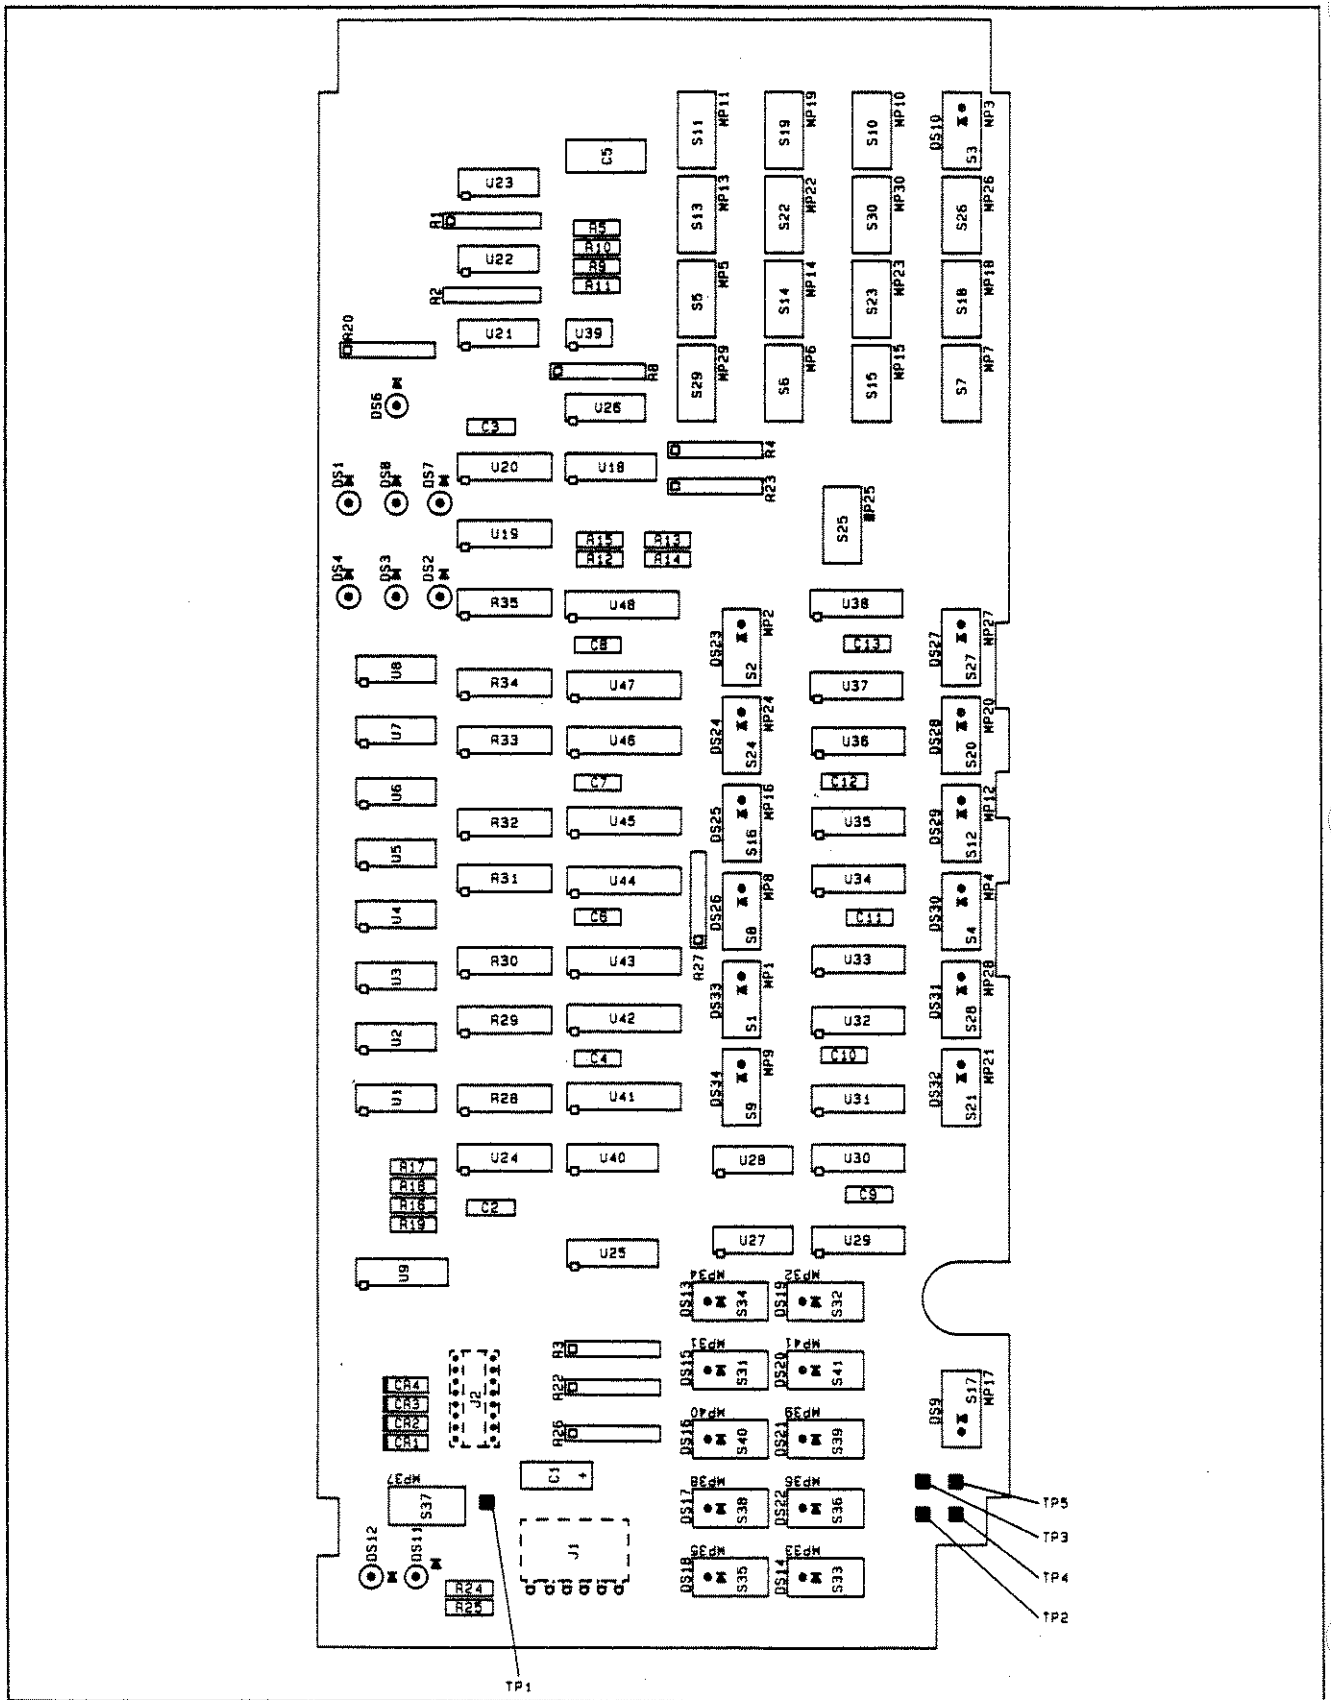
P/O A1 Keyboard and Display Assembly Component Locations (Keyboard Circuits) (P/O CHANGE 43)
